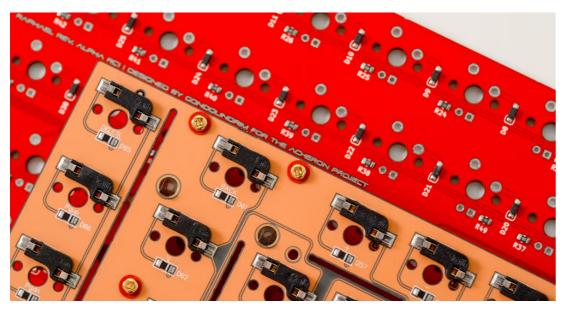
Solder-on PCB (top) and a hot-swappable PCB (bottom) are compared side by side. (S.P. 2023)
